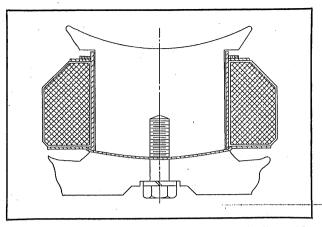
Cross-Section of Field Coil and Pole Assembly
